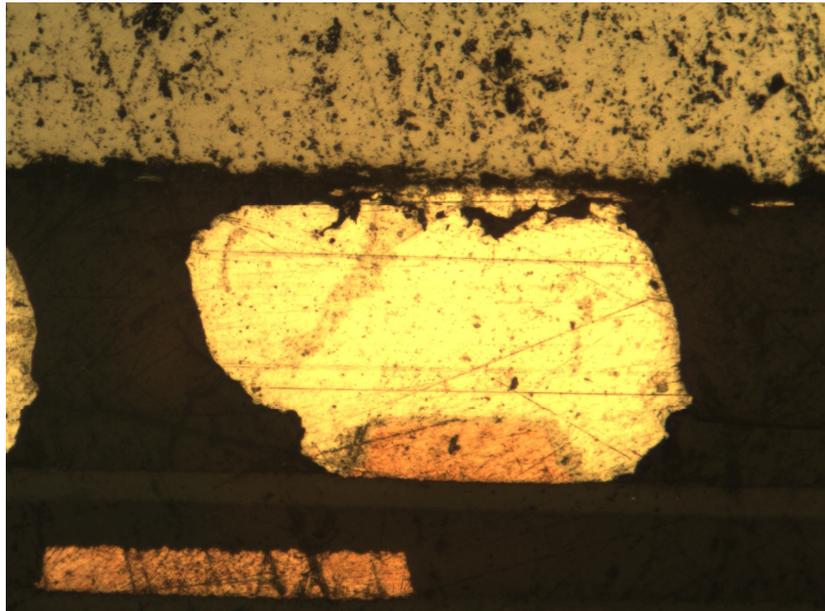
Hot Melt 1 on FLEX Test Board CSP Image
